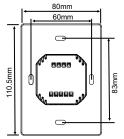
Dimensions - Front View Figure 4. Dimensions - Side View
